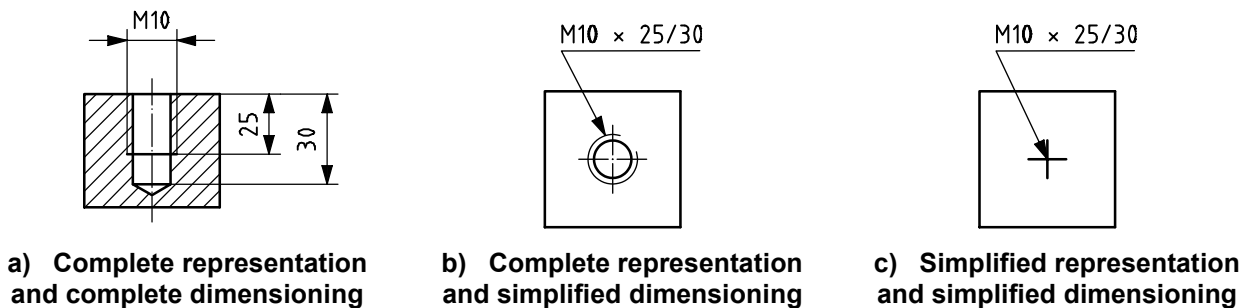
Threaded hole with indication of thread length and cored hole depth (hole bottom not specified)
